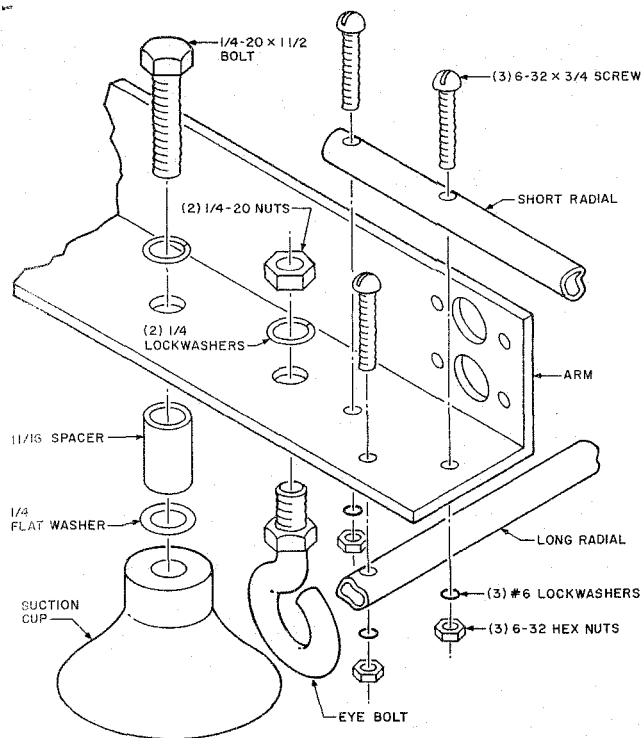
Radial element assembly. The eye bolt and suction cups are required only for car mounting.
